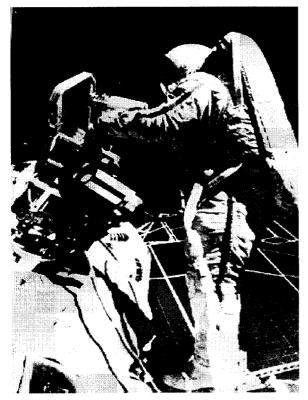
Welding in Space using the Versatile Hand Electron Beam Tool
